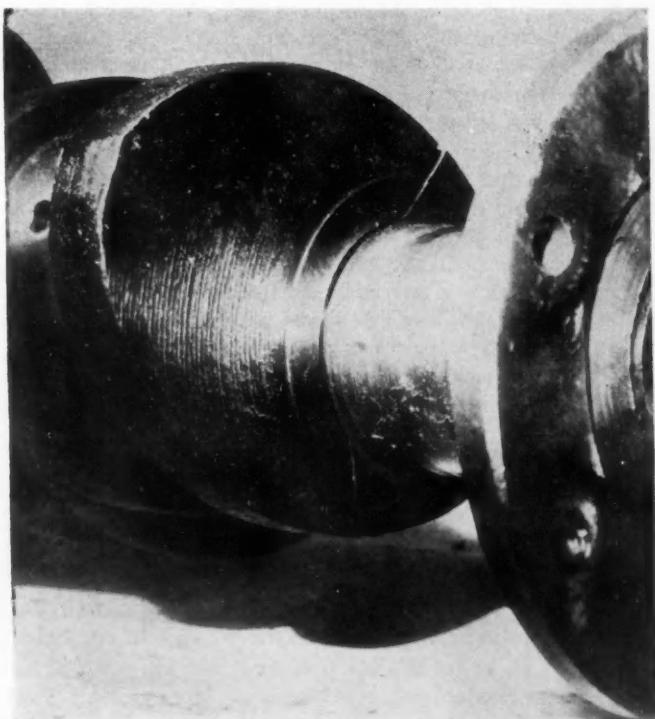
Torsional Vibration Due To Inadequate Damping Causes Crankshaft Failure
